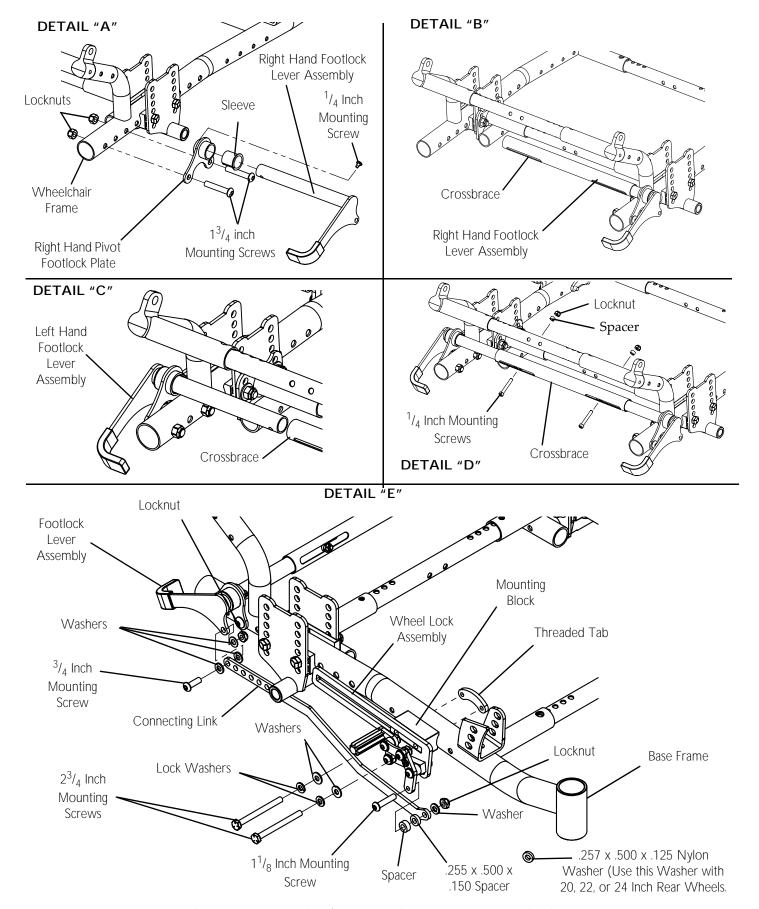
Installing/Removing the Foot Operated Wheel Lock
